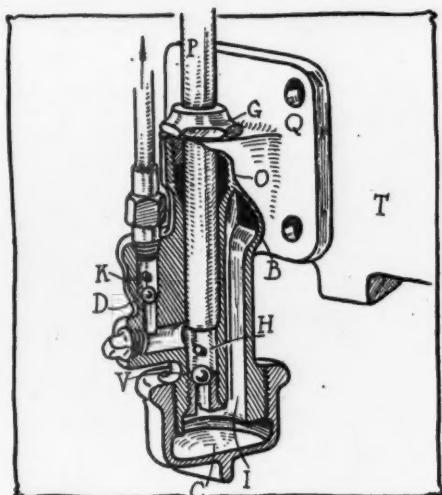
DETAIL OF OIL PUMP OF COLE 30-40 MOTOR
